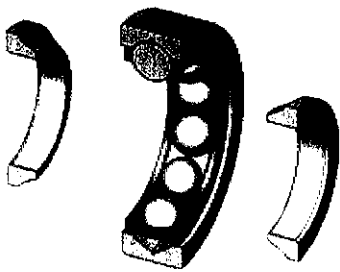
CUT SECTION VIEW OF BEARING
